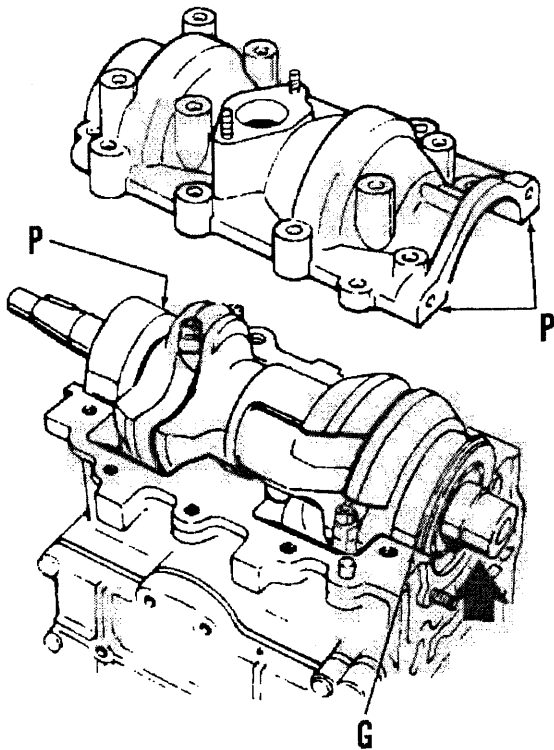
Pry only at three points (P) indicated when removing crankcase cover. Crankshaft should be broken loose from crankcase by tapping with a soft faced hammer in direction of large arrow.
